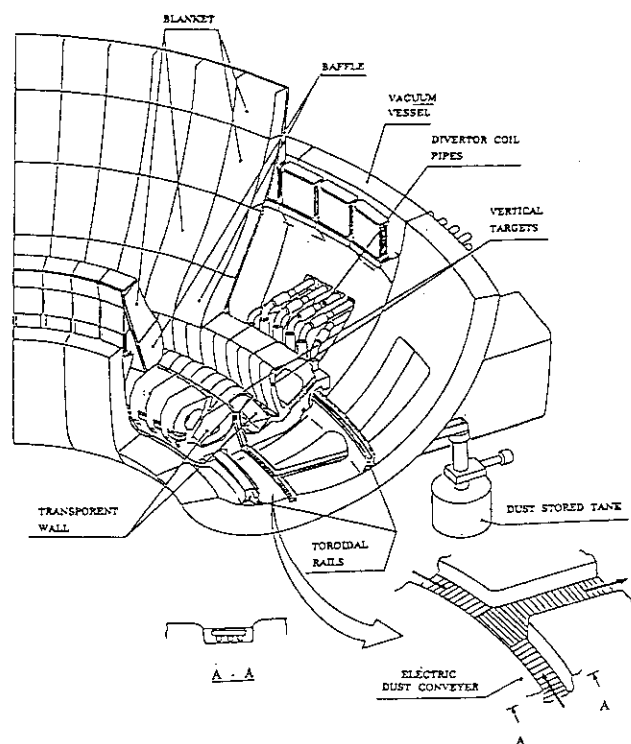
Concept of conveyer belt dust removal system
